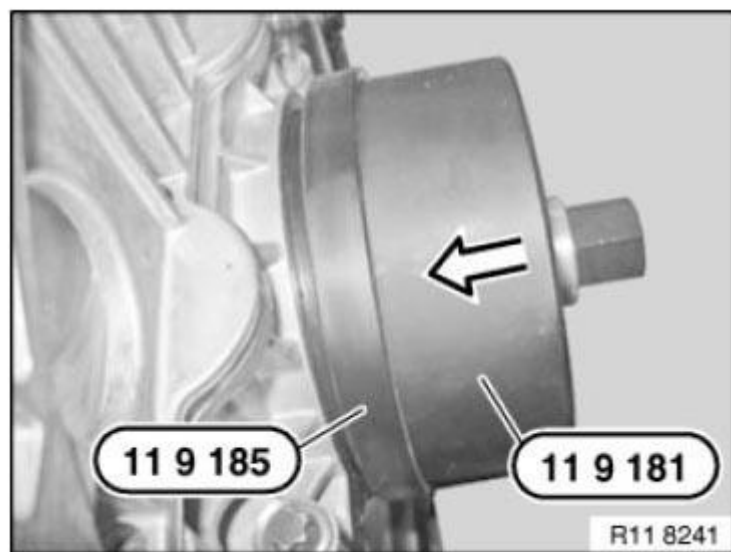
Pulling Radial Shaft Seal Using Special Tool 11 9 181/11 9 185/11 9 183
